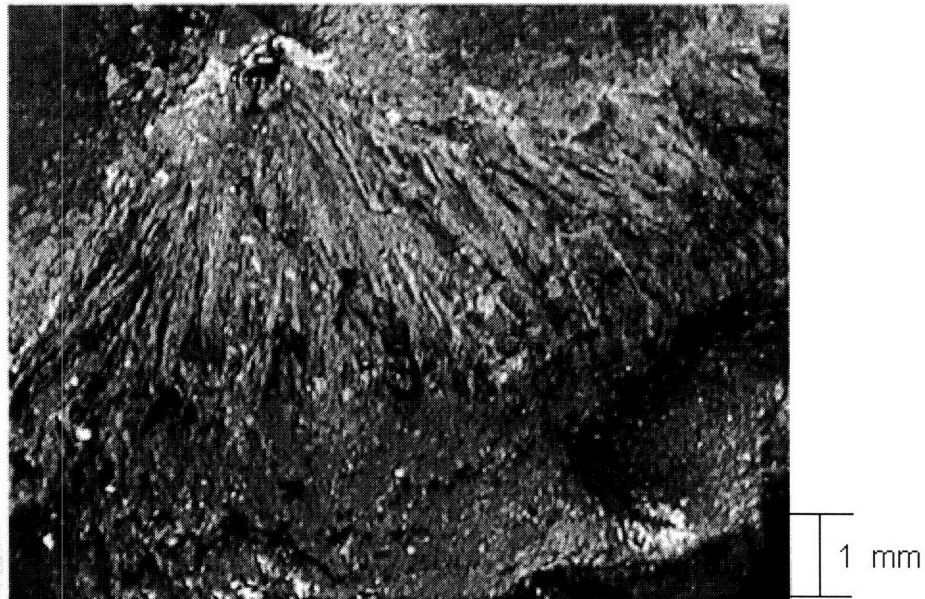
Close view of specimen 3 weld fractured surface.
